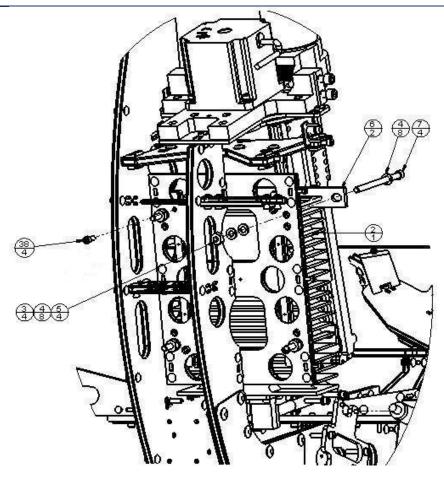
Standard Ku-Band 4W ODU (BUC) Assembly - Detail B
